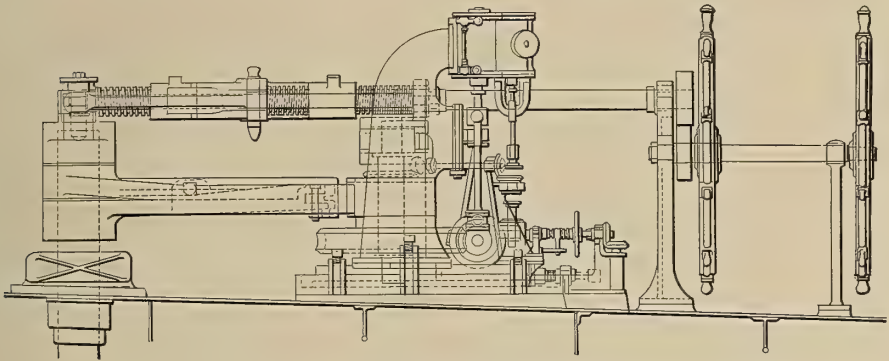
WILSON & PIRRIE'S STEAM STEERING GEAR. CONSTRUCTED BY MESSRS. HARLAND & WOLFF, LTD., BELFAST.
